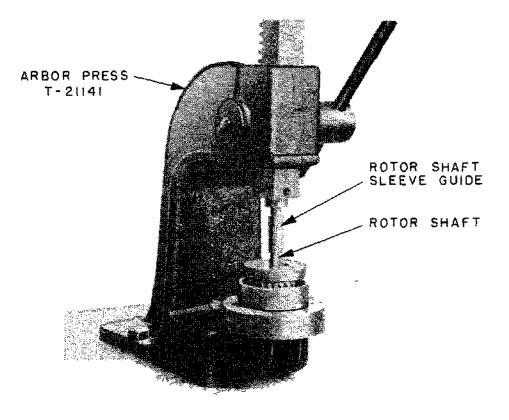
PRESSING THE SHAFT INTO THE ROTOR
